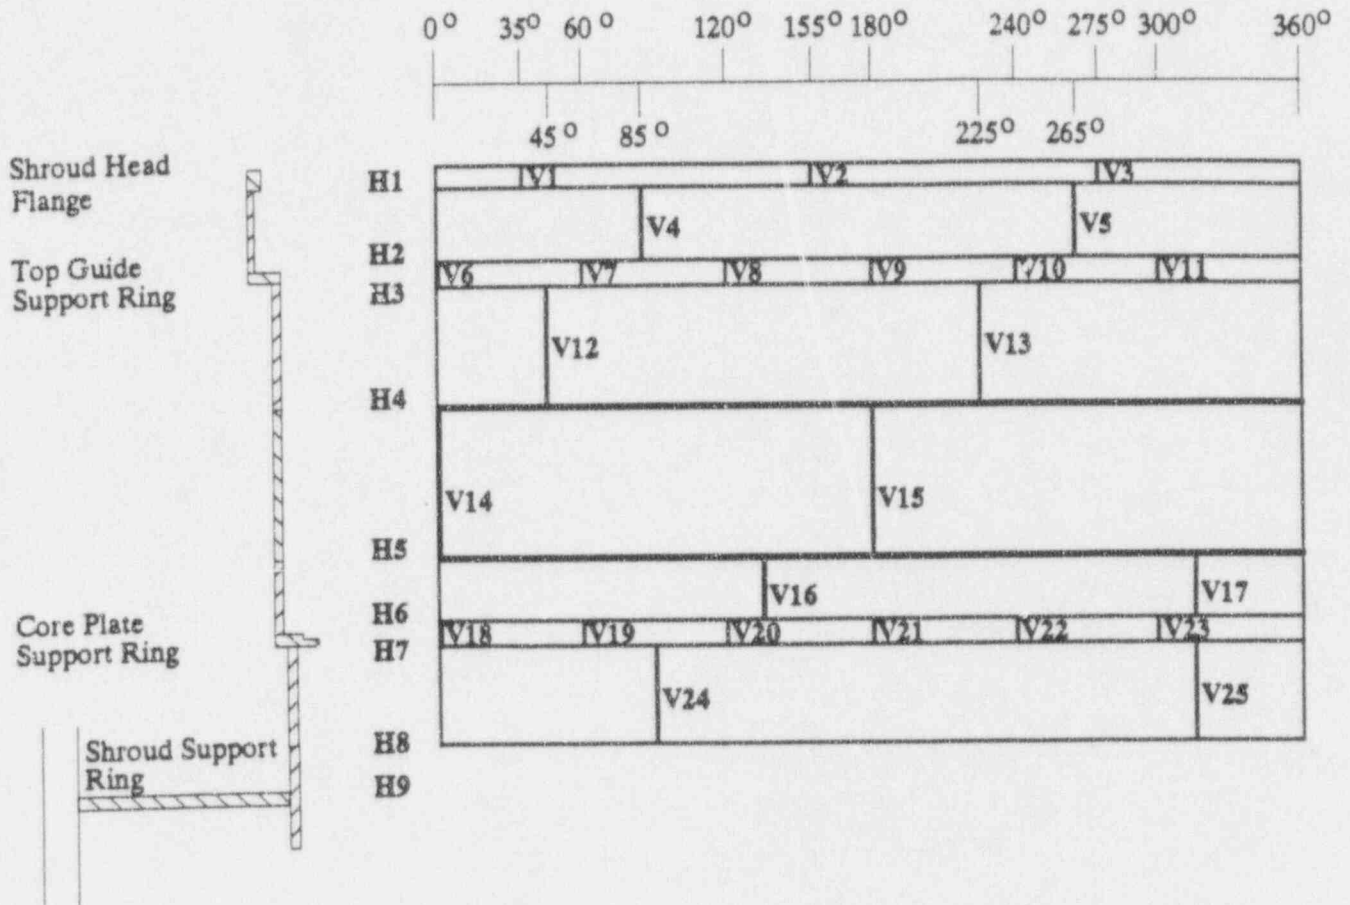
Sketch Showing Typical Welds in Core Shroud (Example)
